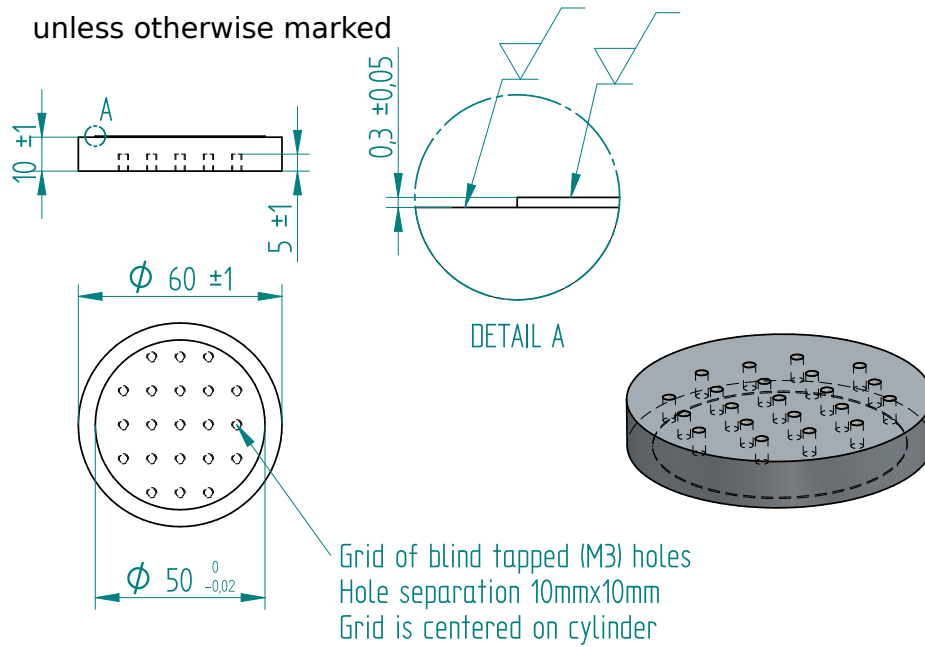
Technical drawing of the base of a puck, containing dimensions used in some modern versions of the design. This side will be upwards facing if using the length of the pinch-off tube to control superfluid film thickness. Stycast epoxy (2850FT) gets applied in a thin layer around the recessed edge (and any optical fibers) before the top and base of the puck are pressed together.
